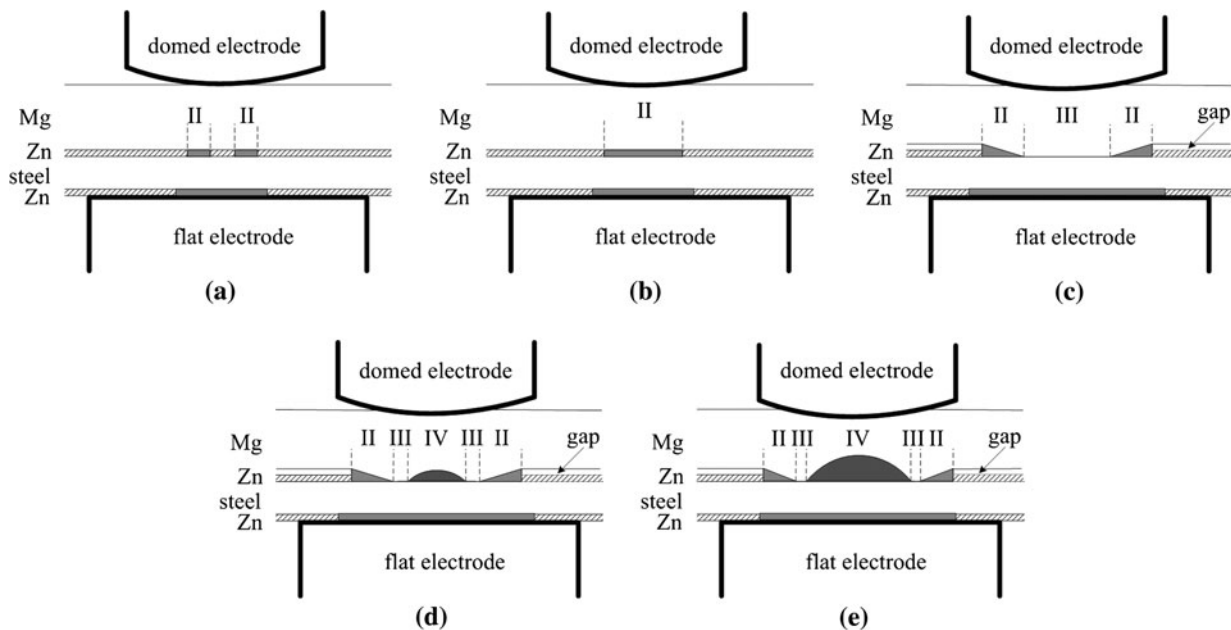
Schematic diagram of joint formation during welding of magnesium to steel sheets, depicting (a) melting initiates at Mg–Zn interface with a donut shape, (b) totally melting of Zn and soldering of Zn to Mg, (c) squeezing Zn out, (d) melting and brazing of Mg to steel, and (e) growth of the nugget.
